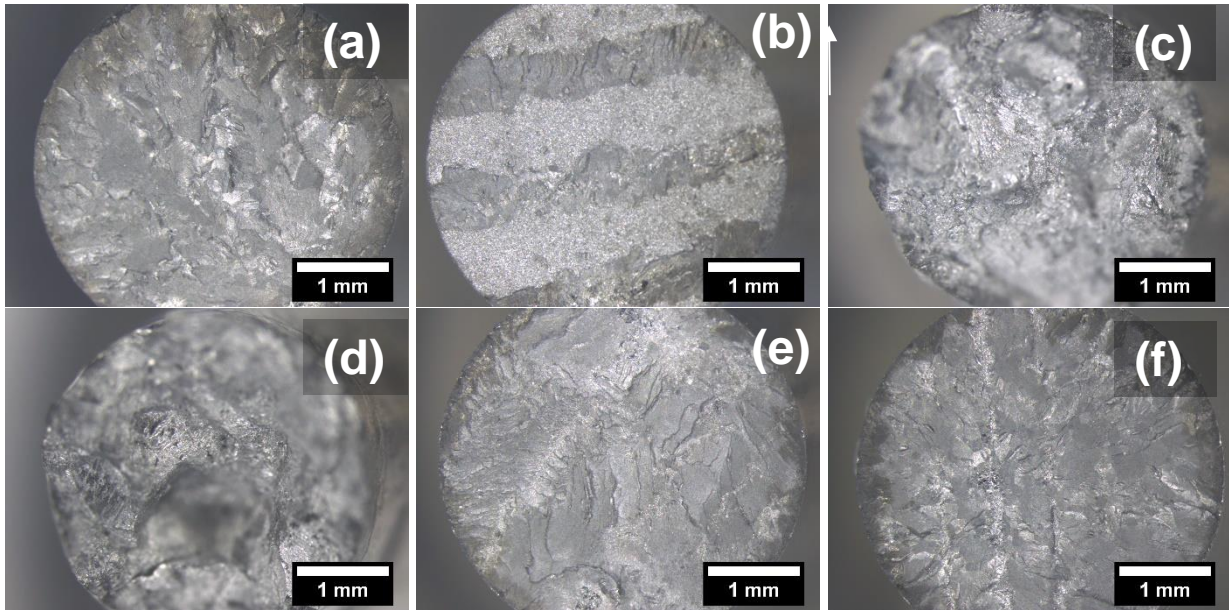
Stereo micrographs showing the fractured surfaces of hybrid manufactured and tensile tested specimens, the specimens were prepared with (a)-(c) Ablation, and (d)-(f) Just-cut, prior to additive manufacturing
